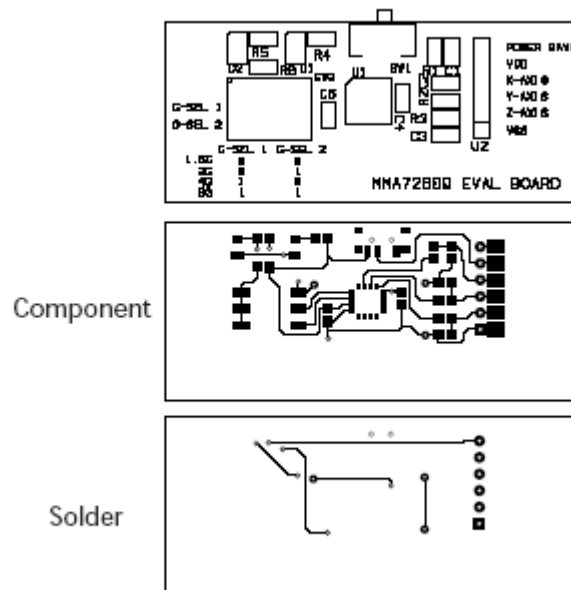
Board Layout for Component, Top Layer, and Bottom Layer
